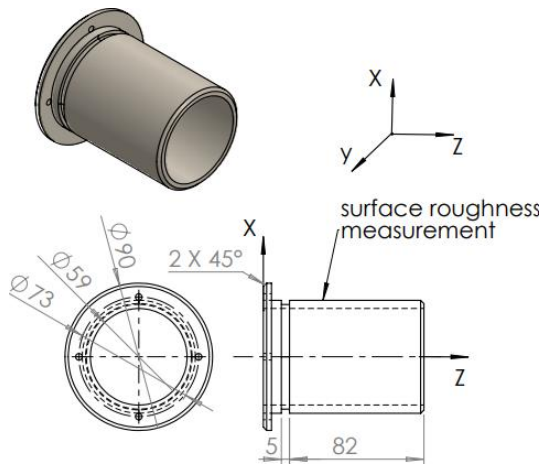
Illustration of surface roughness measurement, performed three times along generatrices of the machined workpiece
